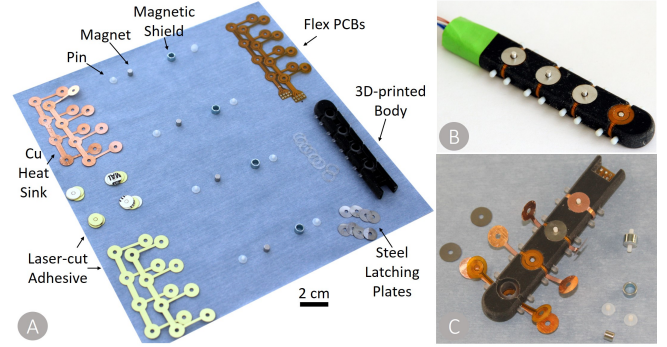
MagTics' components and assembly. A) All elements prior to assembly. B) MagTics with each taxel at a different assembly state. The PCB is routed along the bottom of the device (thus providing the bottom coils), and wrapped around the sides of the device, bringing the top coil into position. A steel latching plate is bonded on the coils, followed by a thin copper heat sink. C) A completed device, with the rightmost taxel lacking a latching plate to reveal the coils.
